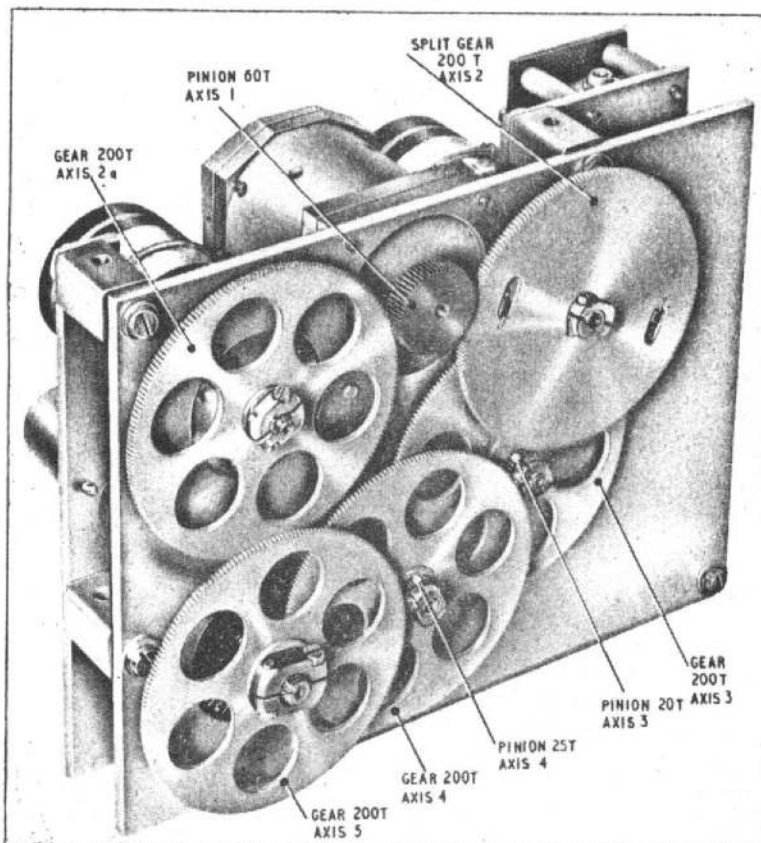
Rate of climb gearbox assembly (G2)—view B (pre-mod. ADS/80)
